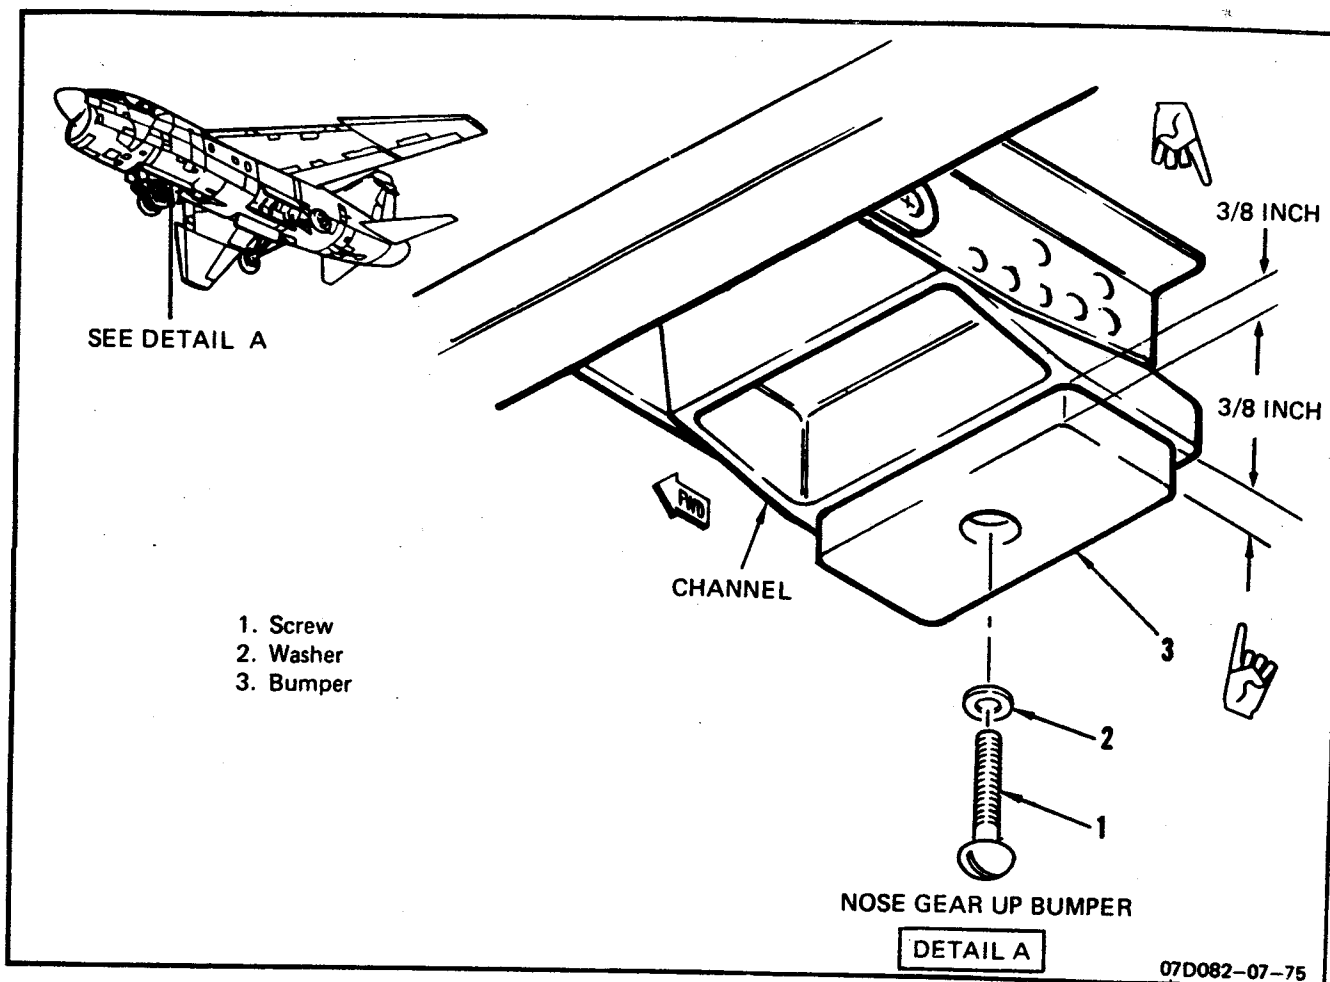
Nose Gear Up Bumper Removal and Installation
